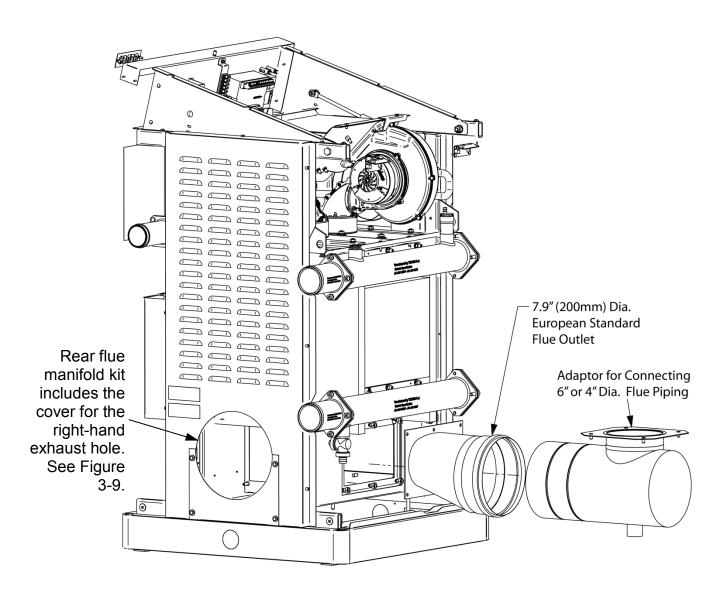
Rear Exhaust Kit (P/N 00364937) for Changing Exhaust Outlet from RIGHT HAND side to REAR on EXT 802, 962, 1123 (only)
